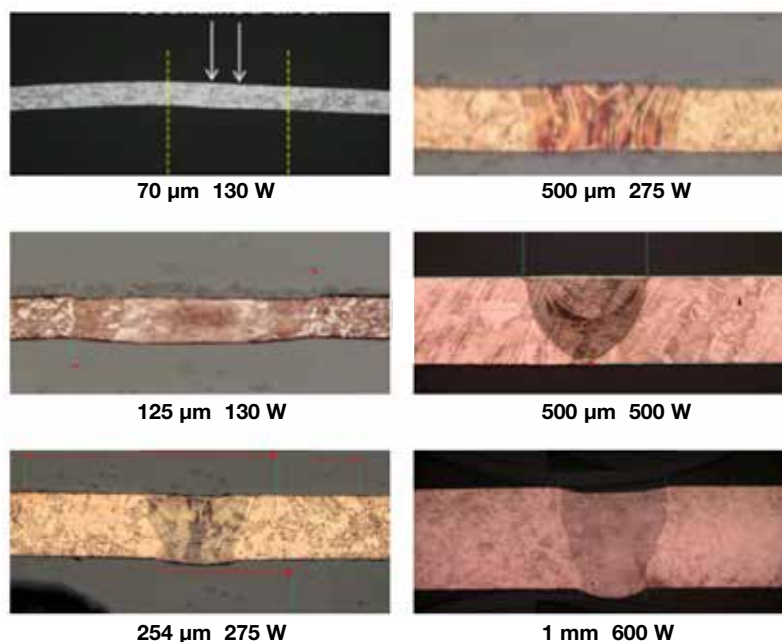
Blue laser welding has a wide process window — laser parameters can be set and maintained to produce high-quality welding for a wide range of copper thicknesses.
